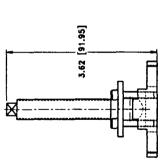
PBPM KINEMATIC MOUNT FLAT ASSEMBLY
